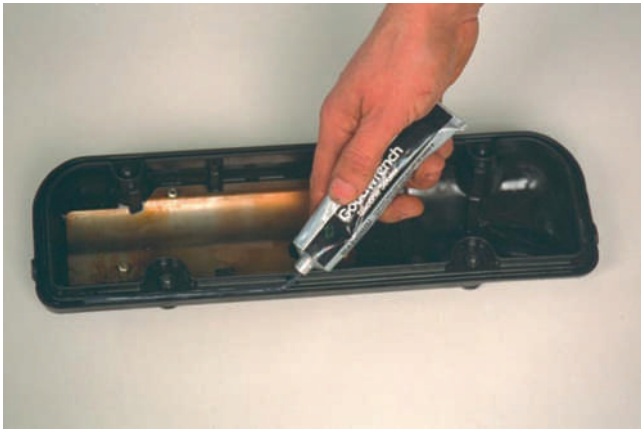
Applying a bead of RTV gasket material on a valve cover.
